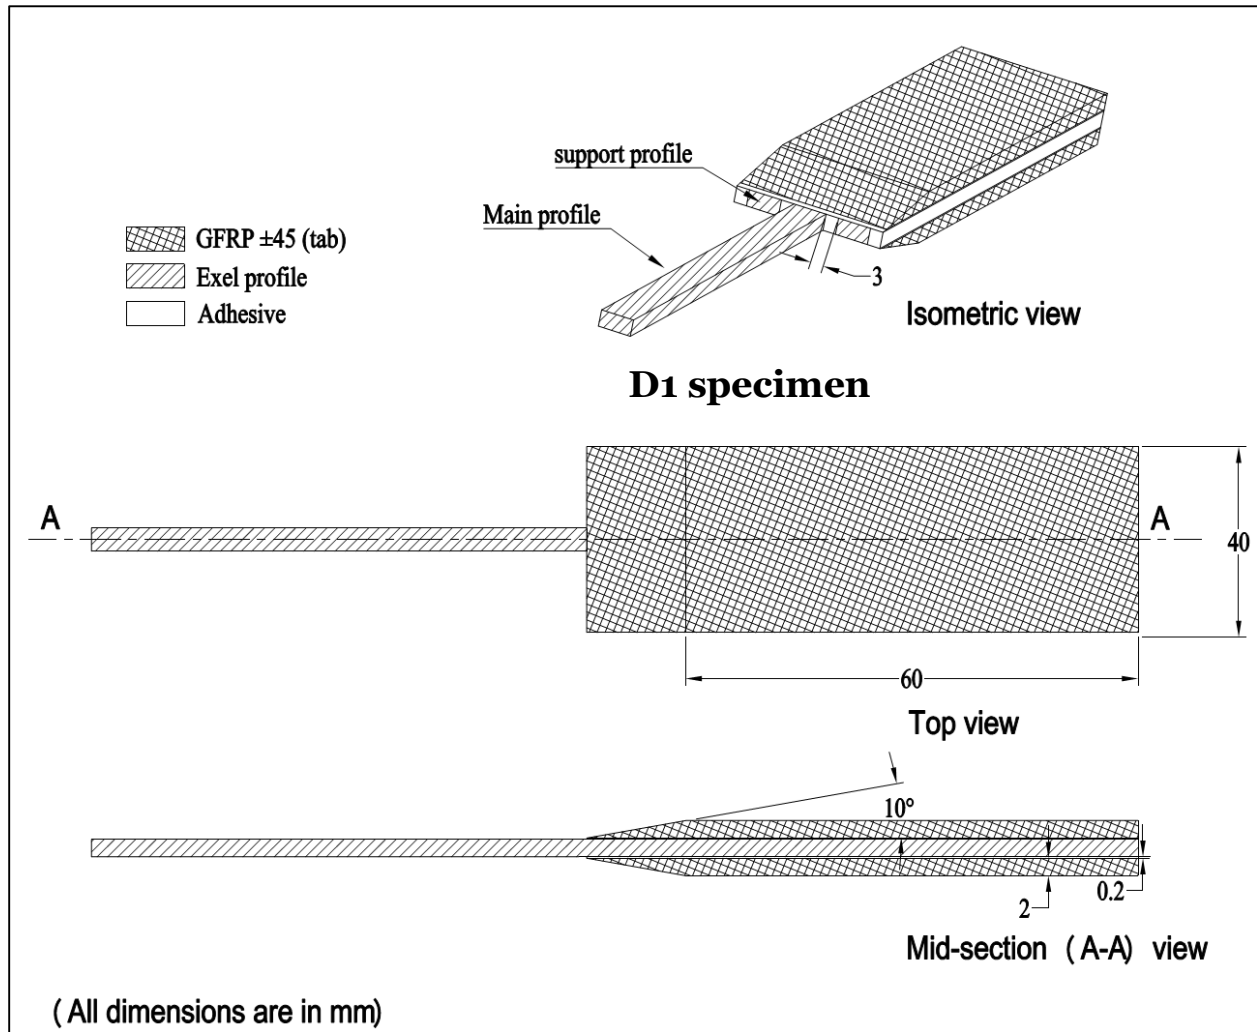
Half specimen displaying new specimen design D1 for the Exel profile
